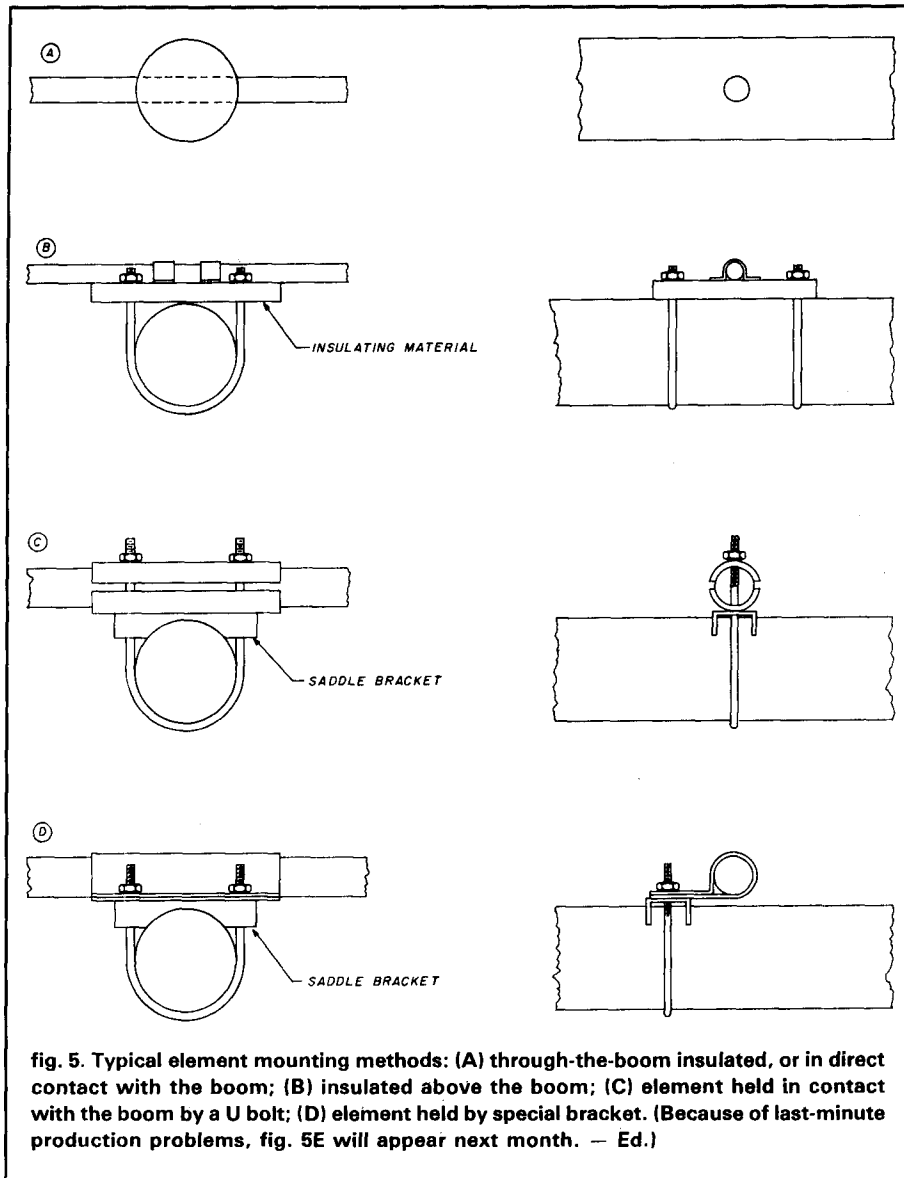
Typical element mounting methods: (A) through-the-boom insulated, or in direct contact with the boom; (B) insulated above the boom; (C) element held in contact with the boom by a U bolt; (D) element held by special bracket. (Because of last-minute production problems, fig. 5E will appear next month. — Ed.)
